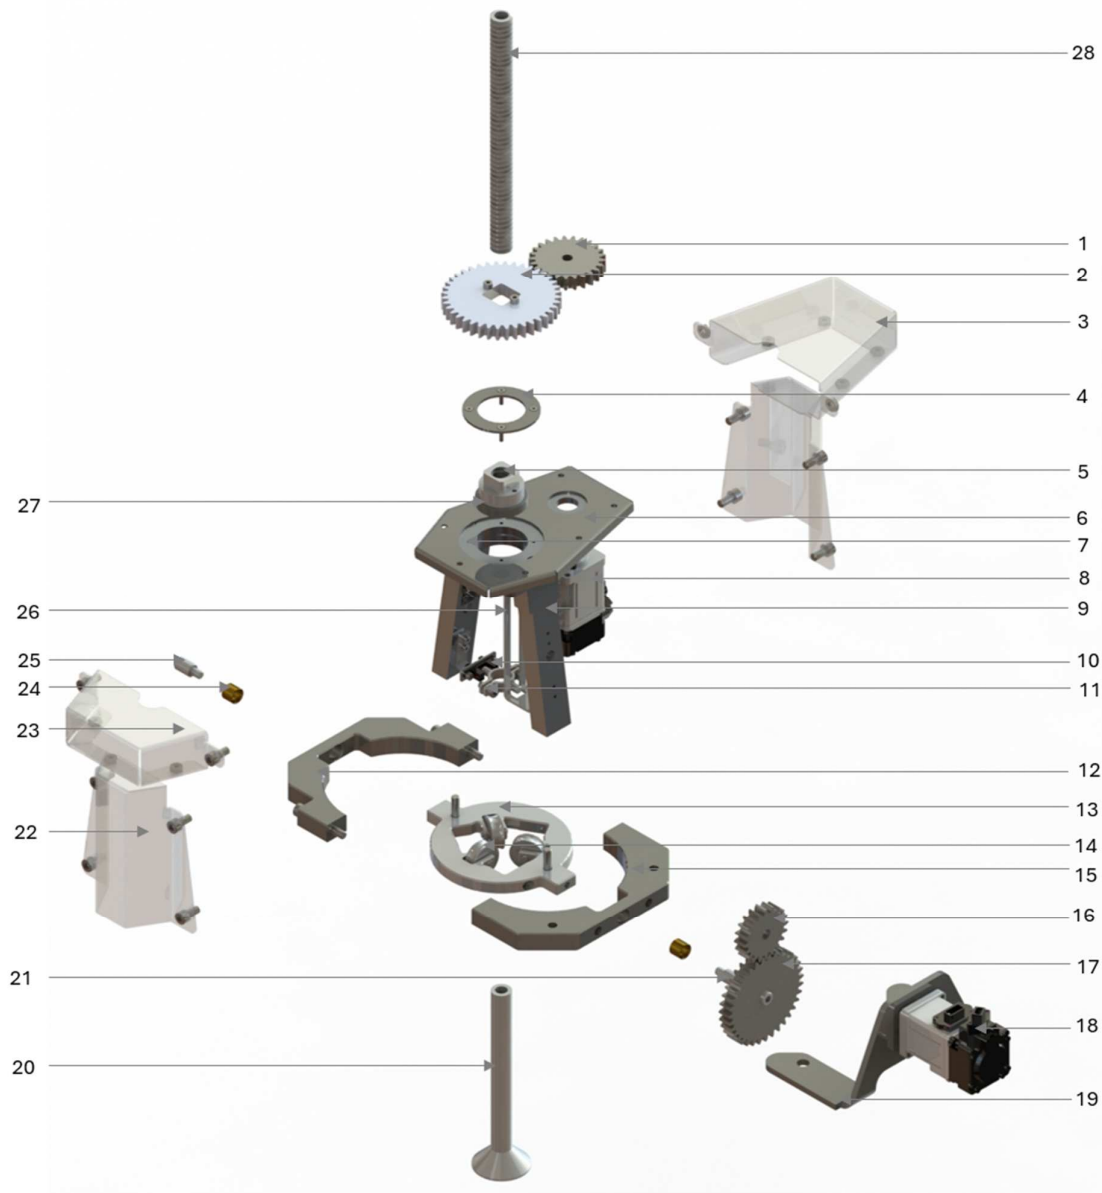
3D model of the steam delivery system at the soil surface - exploded view, where: 1 – Pinion; 2 – Driven gear wheel for vertical rod movement; 3 – Right cover; 4 – Circular cover; 5 – Special nut; 6 – Protection plate; 7 – Upper plate; 8 – Motor for controlling vertical rod movement; 9 – Support elements; 10 – Slotted optical switch; 11 – Circular element for detecting minimum and maximum positions; 12 – Left support plate; 13 – Central ring; 14 – Pipe guiding rollers; 15 – Right support plate; 16 – Pinion for module tilt angle adjustment; 17 – Driven gear wheel for tilt angle control; 18 – Motor for tilt angle adjustment; 19 – Motor support for tilt angle adjustment; 20 – Pipe with cover for steam direction; 21 – Shaft for supporting and rotating the driven gear wheel and central ring; 22 – Side cover; 23 – Left cover; 24 – Low-friction bushings; 25 – Shaft for supporting and rotating the central ring; 26 – Rotation restriction element for the pipe; 27 – Radial-axial bearing; 28 – Pipe with external trapezoidal thread.
